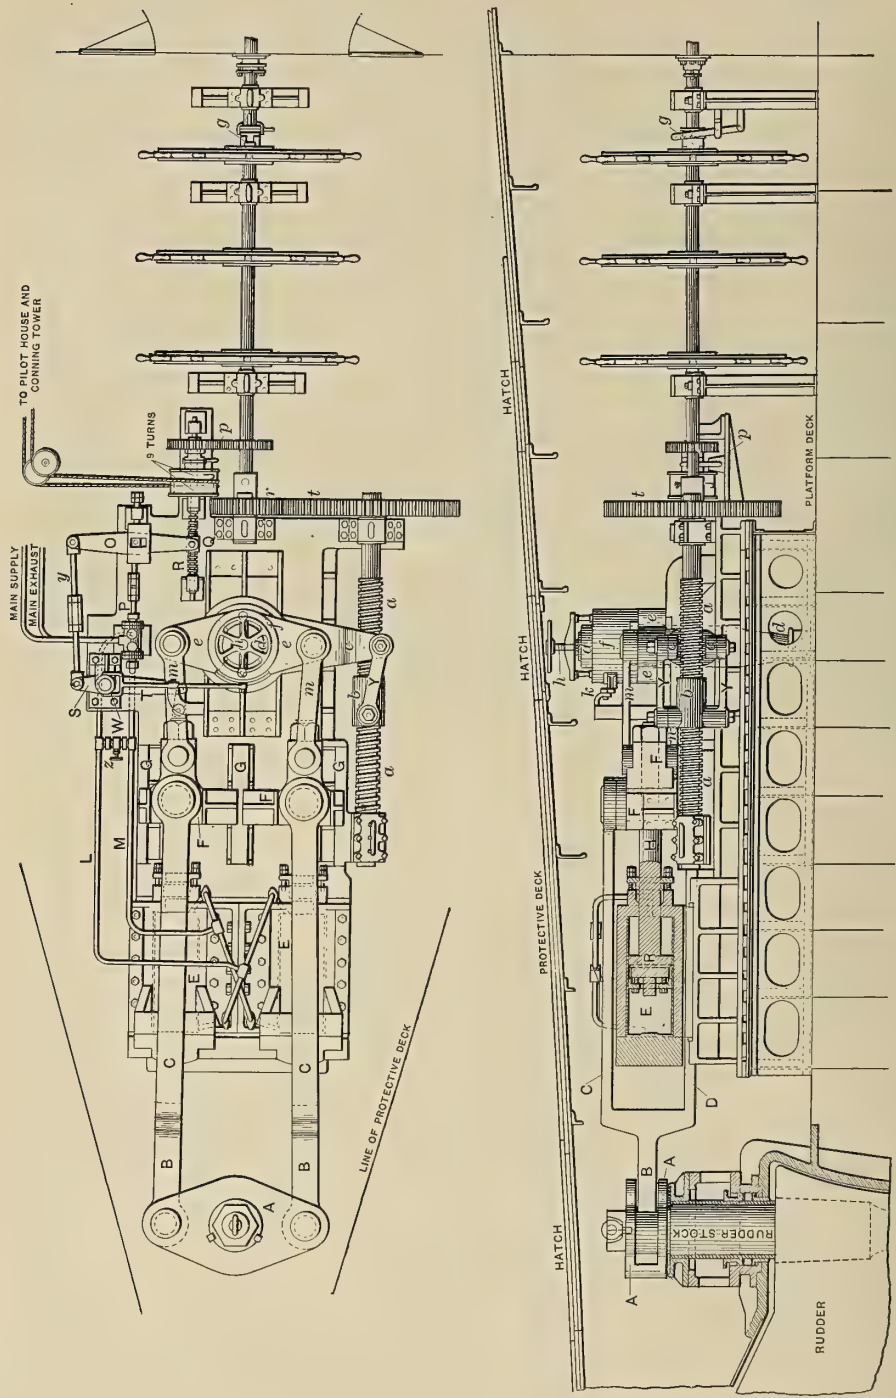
THE HYDRAULIC STEERING GEAR OF THE U. S. CRUISER "OLYMPIA," CONSTRUCTED BY THE UNION IRON WORKS, SAN FRANCISCO, CAL.
